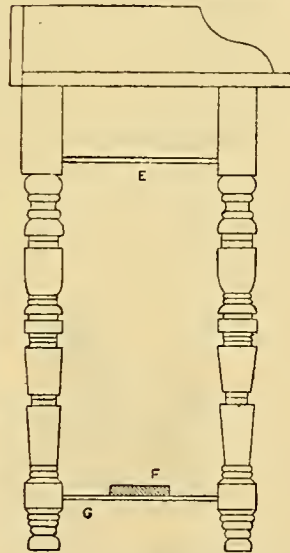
END ELEVATION. Scale, 1 inch to 1 foot.
